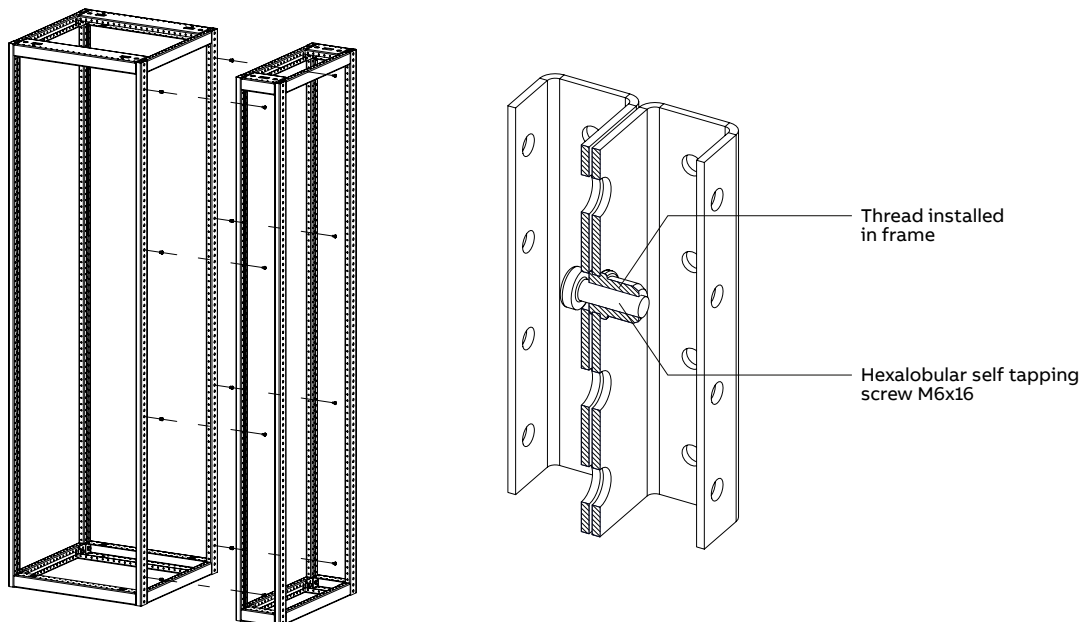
Connection points (threads installed in frame) with detail of connection
